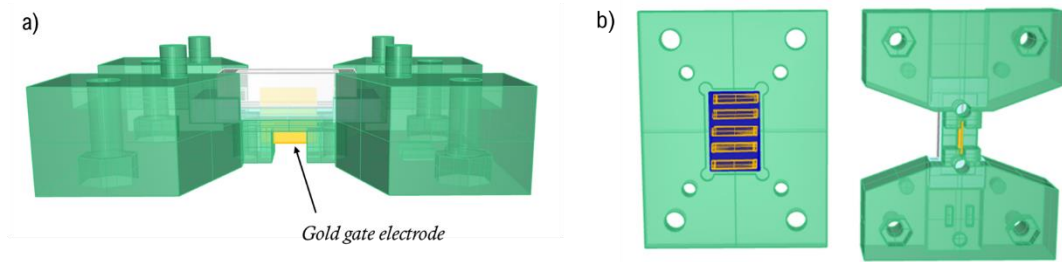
CAD of: a) lateral view of the assembly of: top holder, chamber, and gate electrode; b) top view of the unassembled holder elements. Design by M. Segantini.
